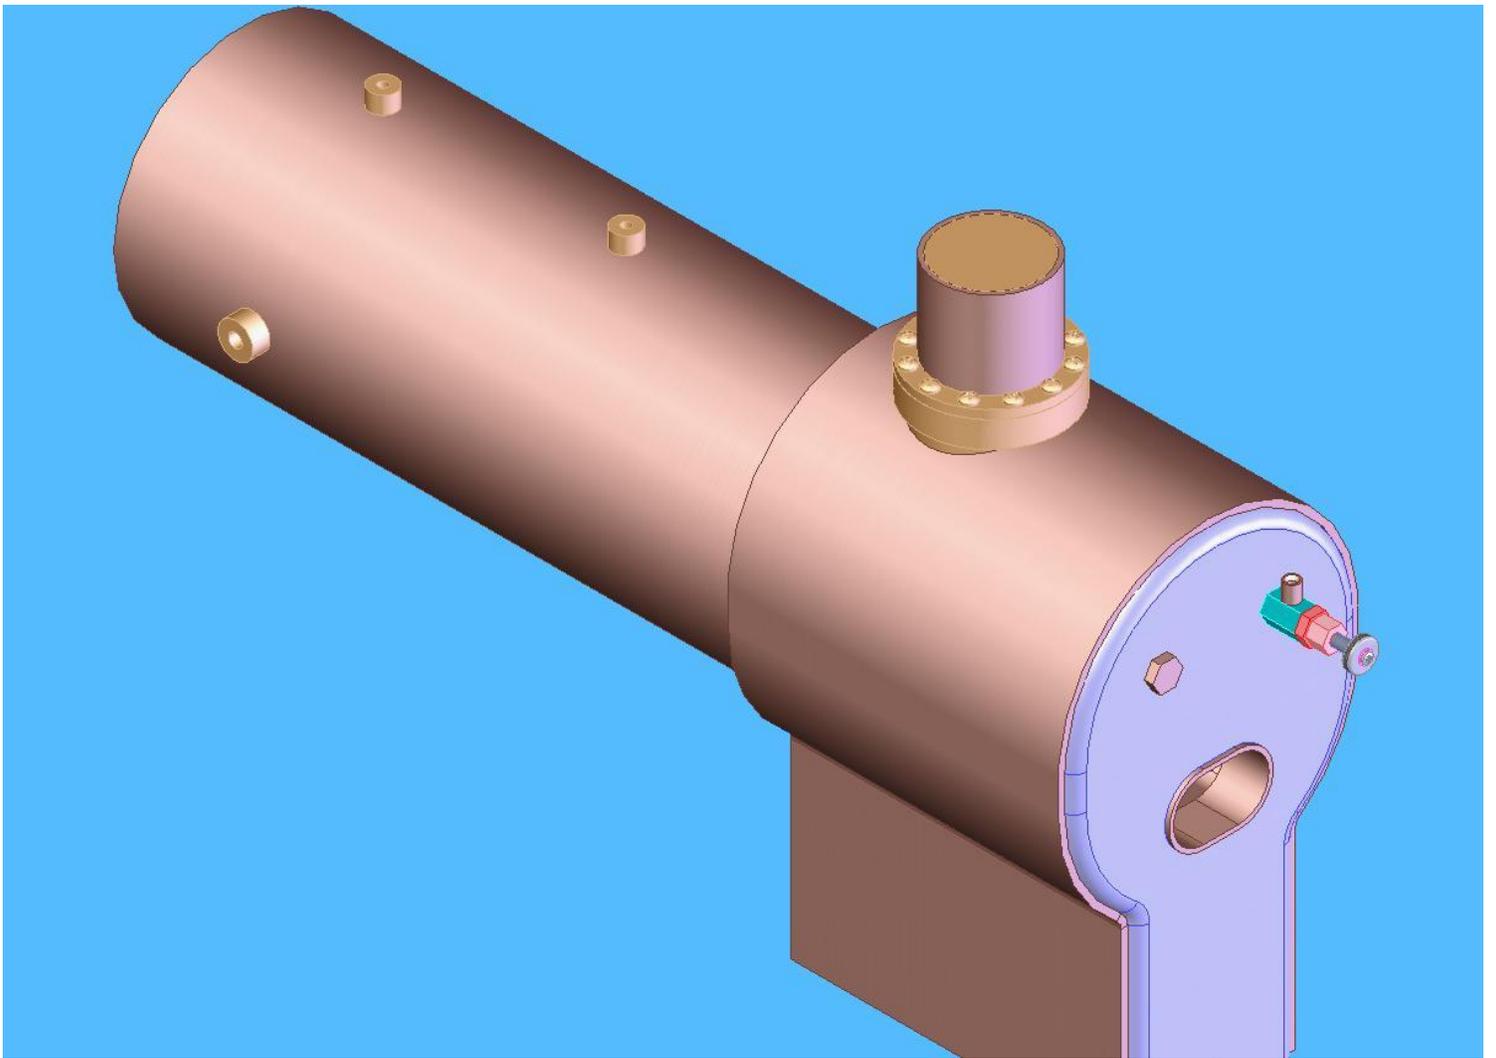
Lower Dome Assembly attached to Boiler with Brass screws.
